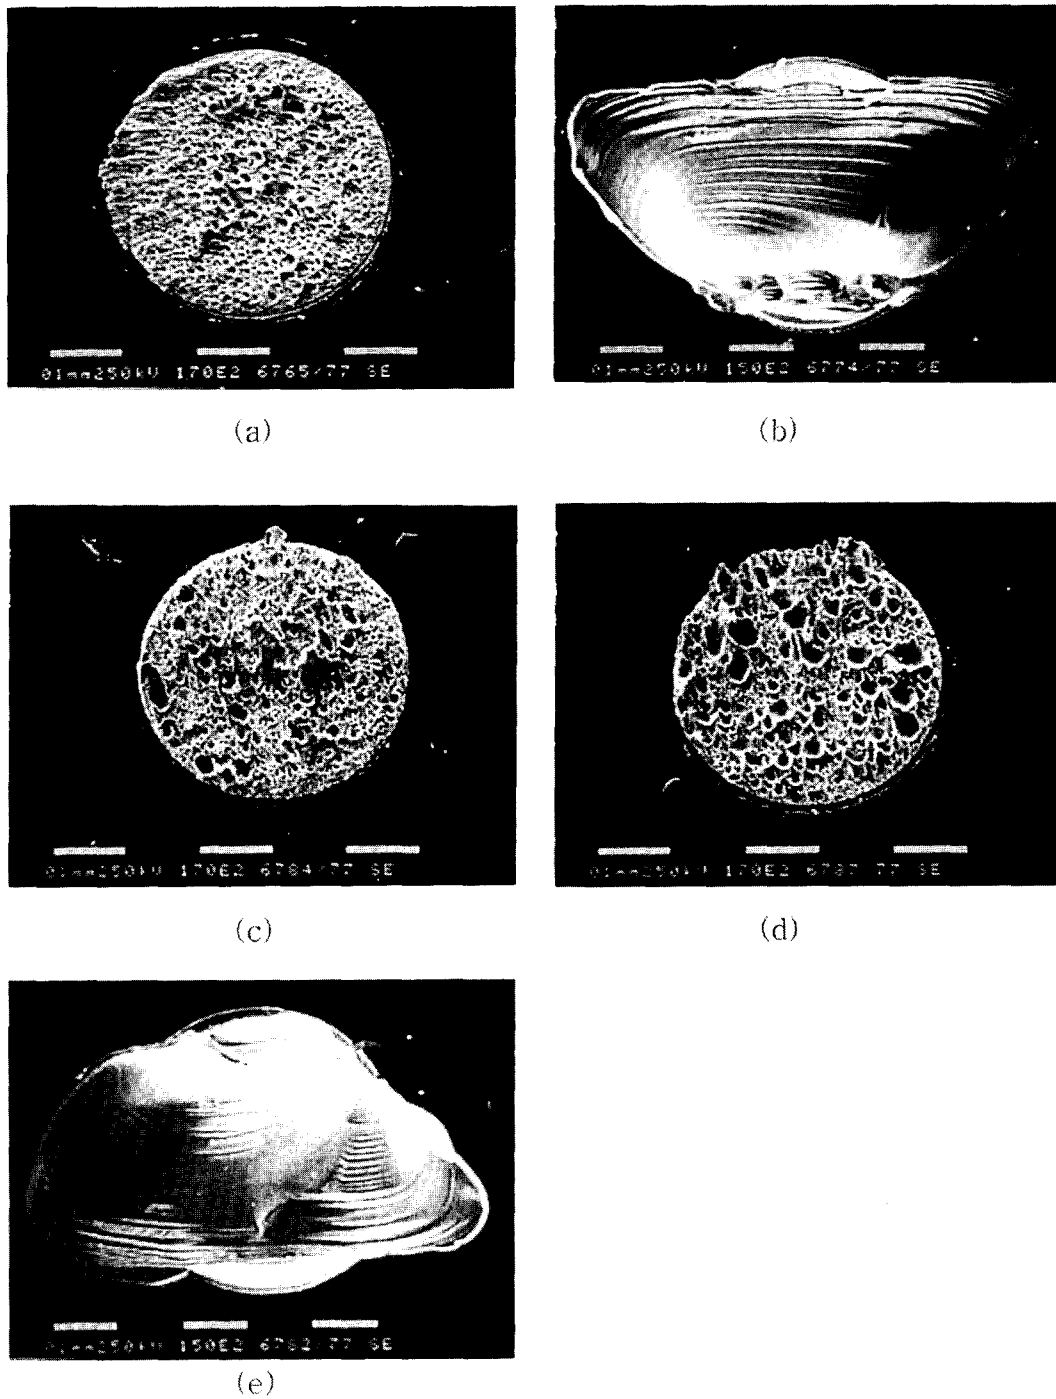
Top view of PbSnAg Solder Bump on E-Cu UBM after Ball Shear test
